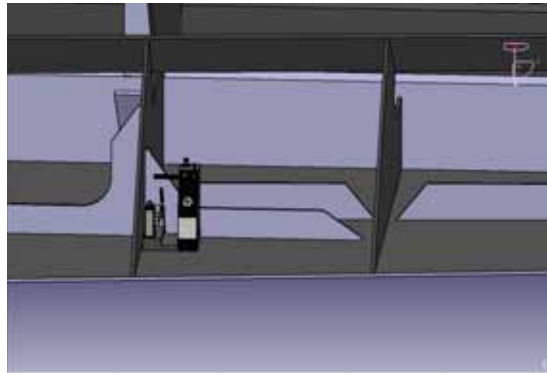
Stiffener Welding Process Using Auto Welding Machine
